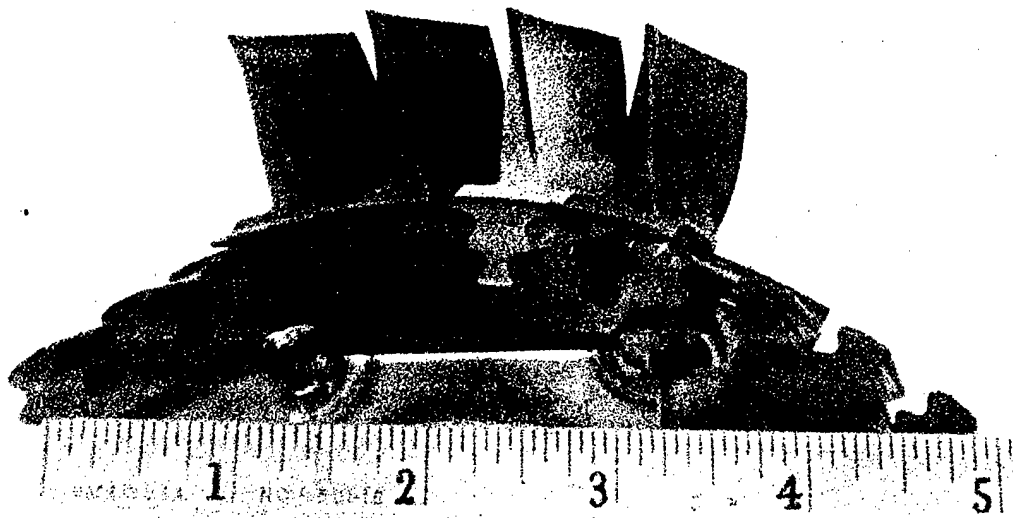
Test blades in disk fixture. Ultramet coating is on the second blade from the right.
